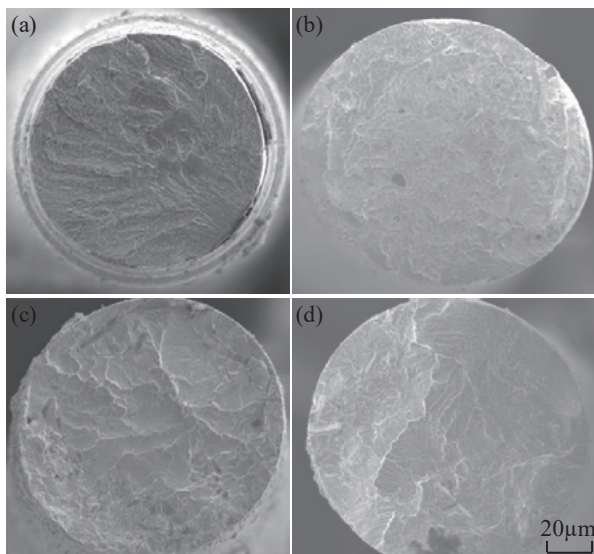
SEM photographs showing fracture surfaces of the joints welded with insert Pd for: (a) J7, (b) J8, (c) J16 and (d) J19.
